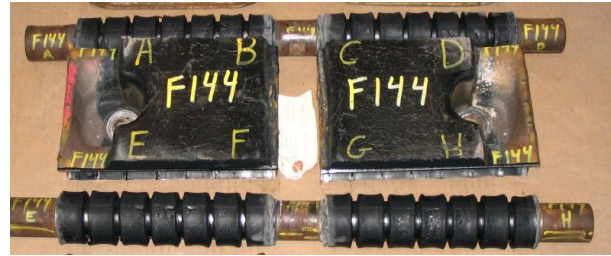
Example embrittlement and cracking of backer pad and bushing assembly M1
